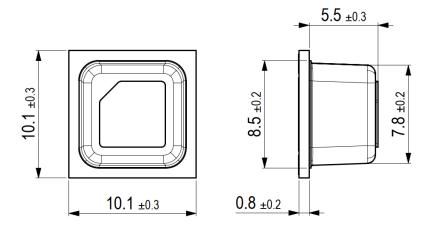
Packaging outline drawing of the SCD4x: (left) top view and (right) side view. Dimensions are given in millimeters.
